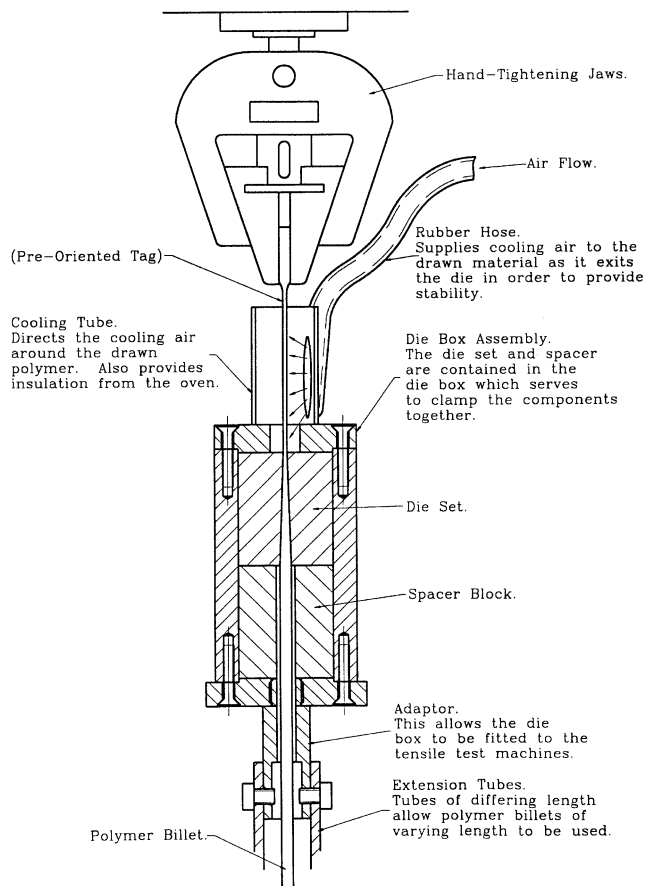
Die assembly block fitted into environmental cabinet of a Hounsfield tensile testing machine.
